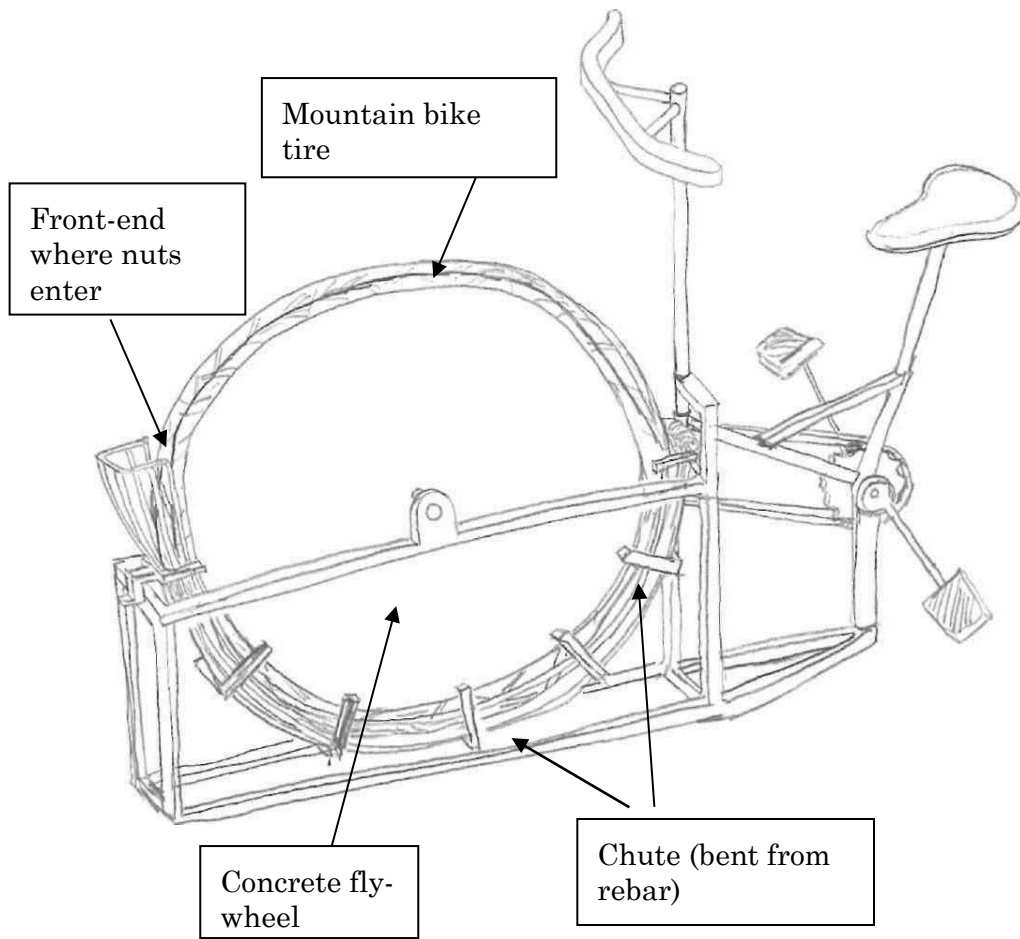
Sketch of Design B Maya Pedal Sheller
